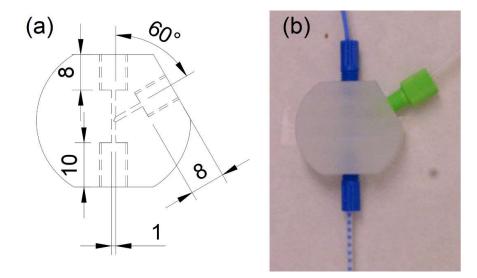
Detail of y-shaped mixers. (a) Technical drawing of y-shaped mixer. Dimensions are in millimetres, and all threads are ¹/₄" UNF. The mixer is formed from a drilled-out block of PTFE cut from 35 mm diameter bar stock. (b) Photograph of y-mixer in use, using DCM and (dyed) water for visualisation of droplet formation. Fluidic connections are made using standard nut-and-ferrule type connectors.
